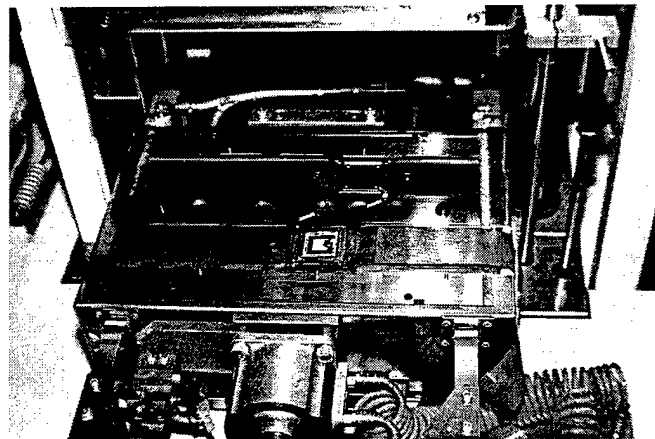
The lead frame and flex cable mounted in the open mold of the press system. During pressing, the lower mold platen moves back into position where it raises to seal against the upper mold platen. The flex cable allows electrical connections to be maintained while the part is pressed in the high temperature environment.
